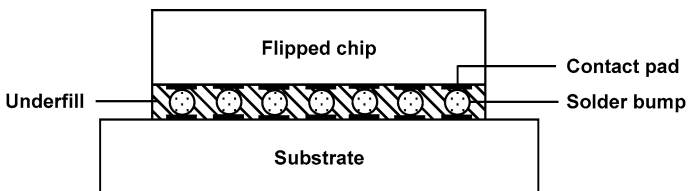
Flip chip electronic assembly involving an array of solder bumps
